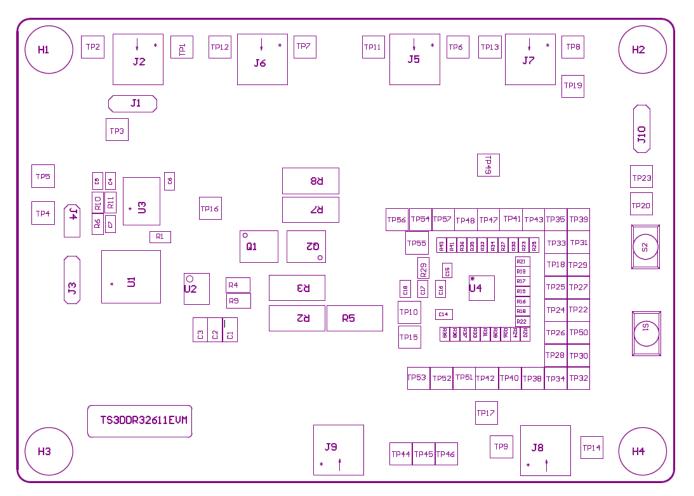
TS3DDR32611 EVM Top Layer Assembly Drawing
